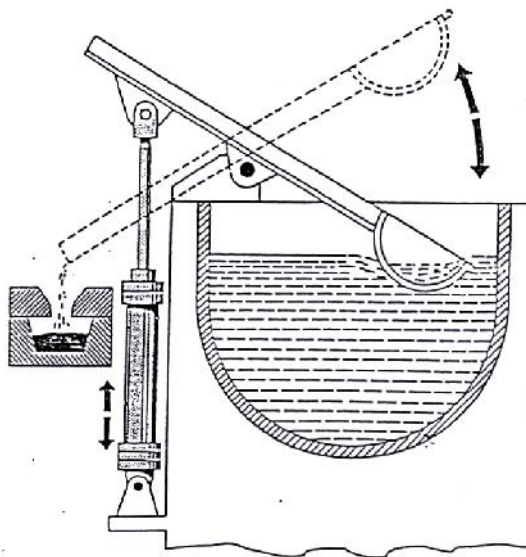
A. 10 Casting Ladle Controlled by Cylinder
